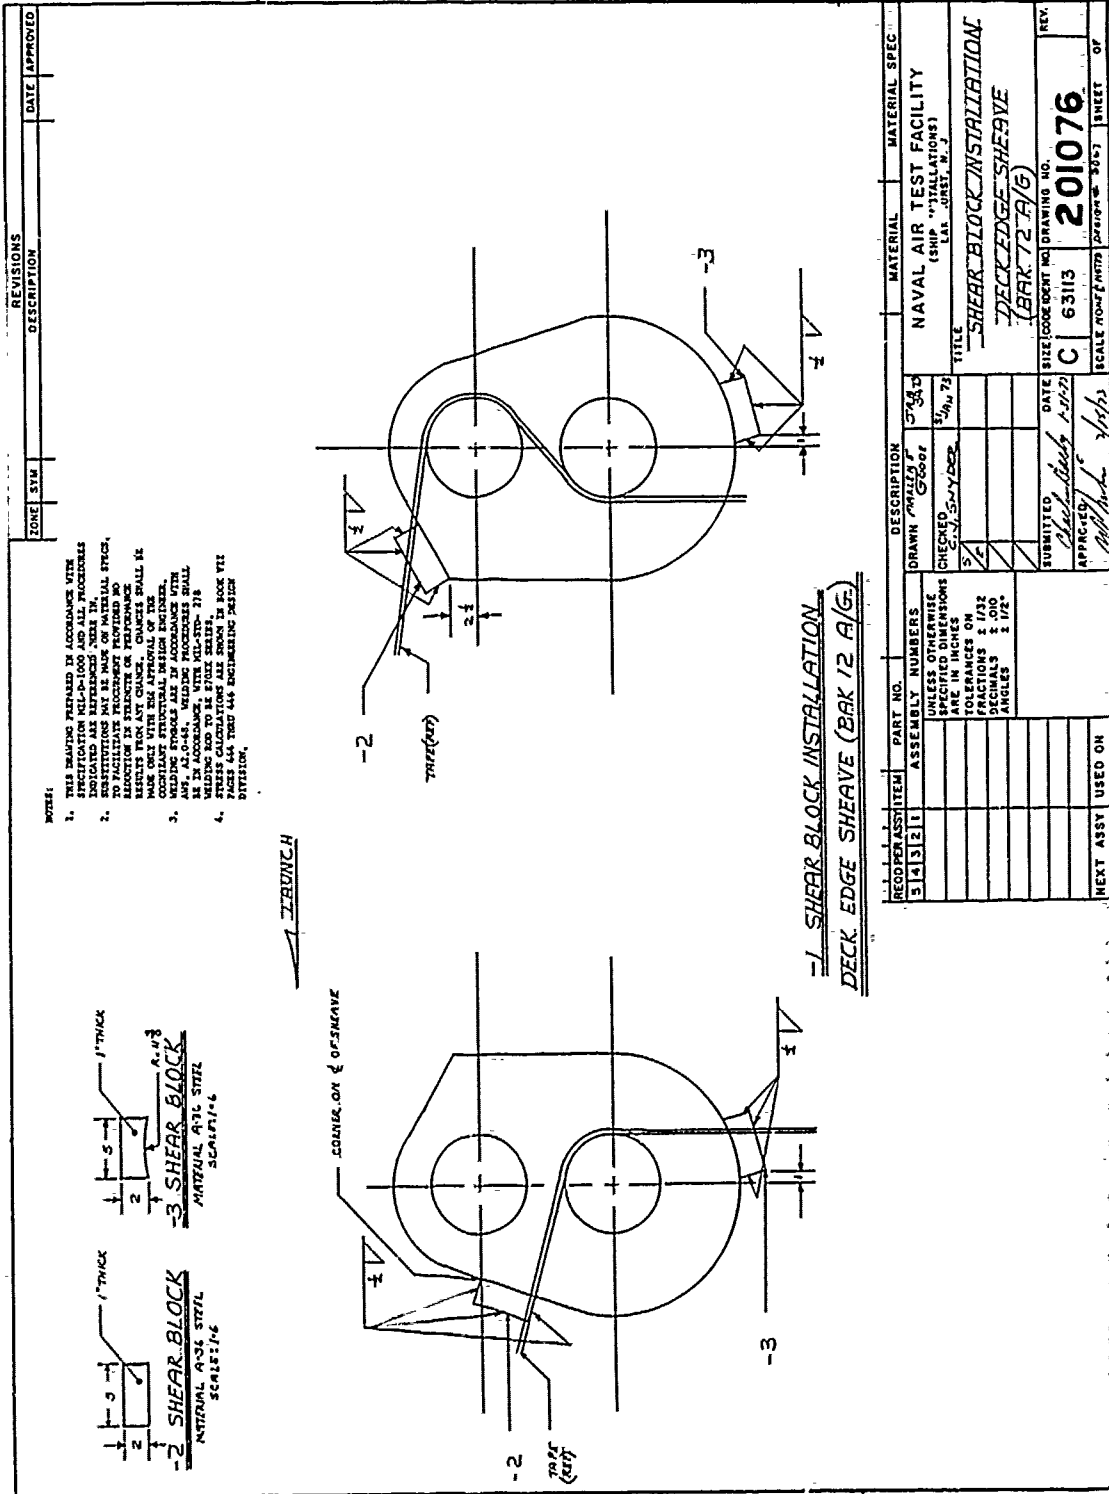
Dual BAK-12 Arresting System Deck-Sheave Shear-Block Installation
